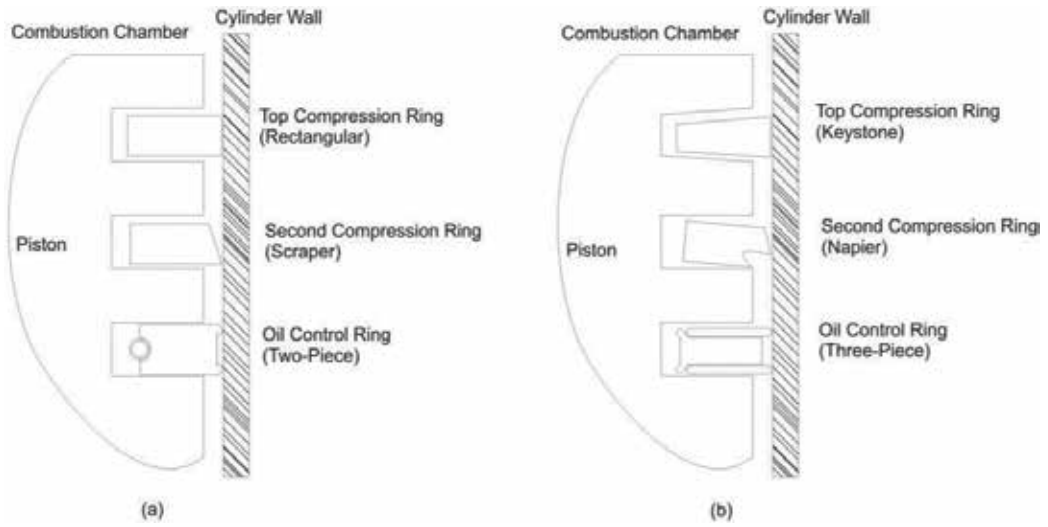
IC engine ring pack: (a) gasoline engine and (b) diesel engine.
